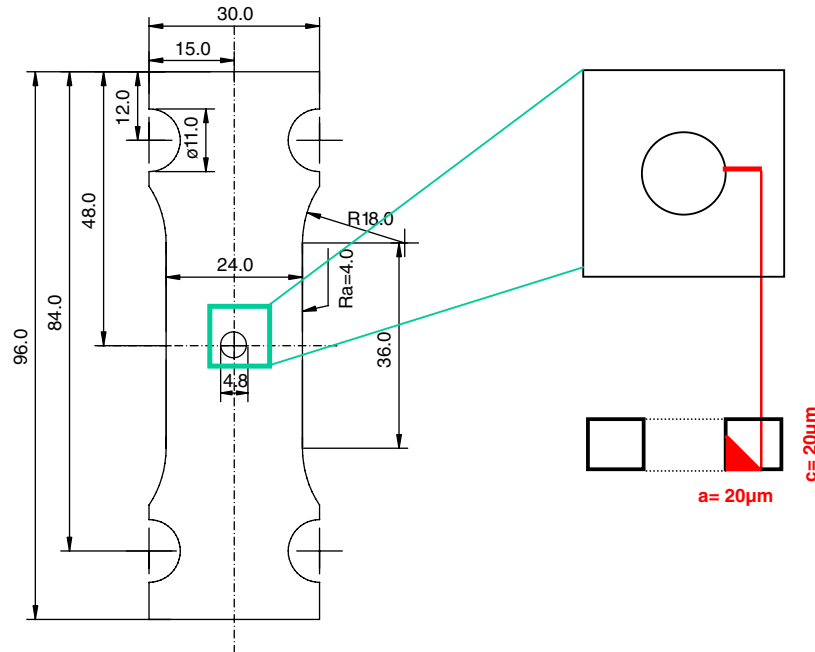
Detailed geometry of the short crack specimen (FIB-specimen) with a starting corner notch of 20 μm in both, in surface and thickness direction.
